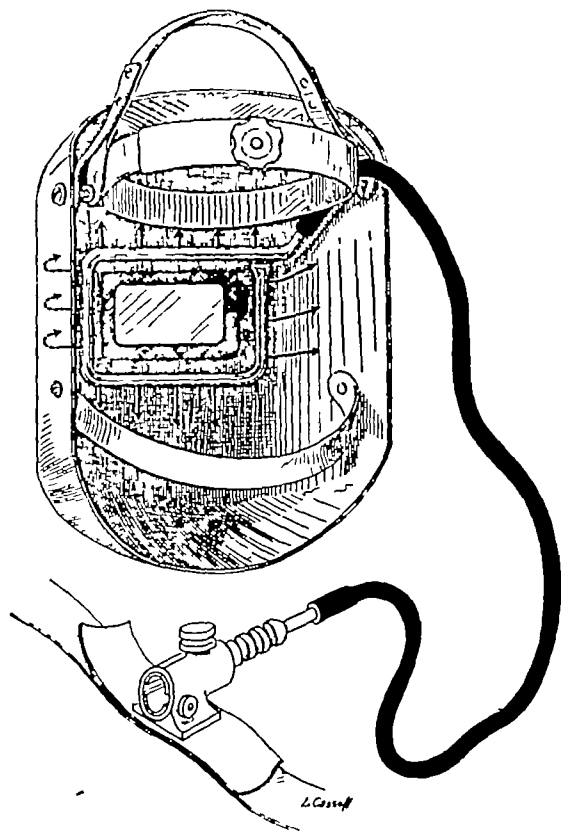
Compressed air unit for ventilating welder's hood. Metal tube, surrounding window, directs outward flowing spray of air.
